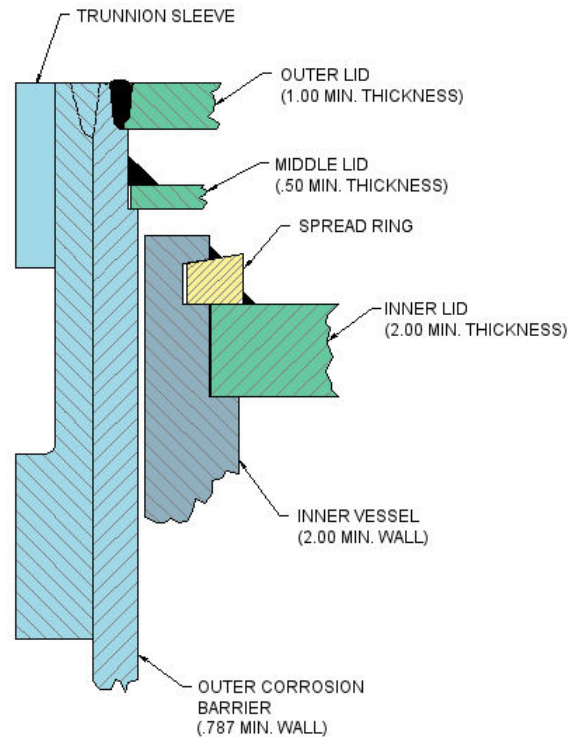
A broke out cross section of a waste package showing the lid weld joints.
